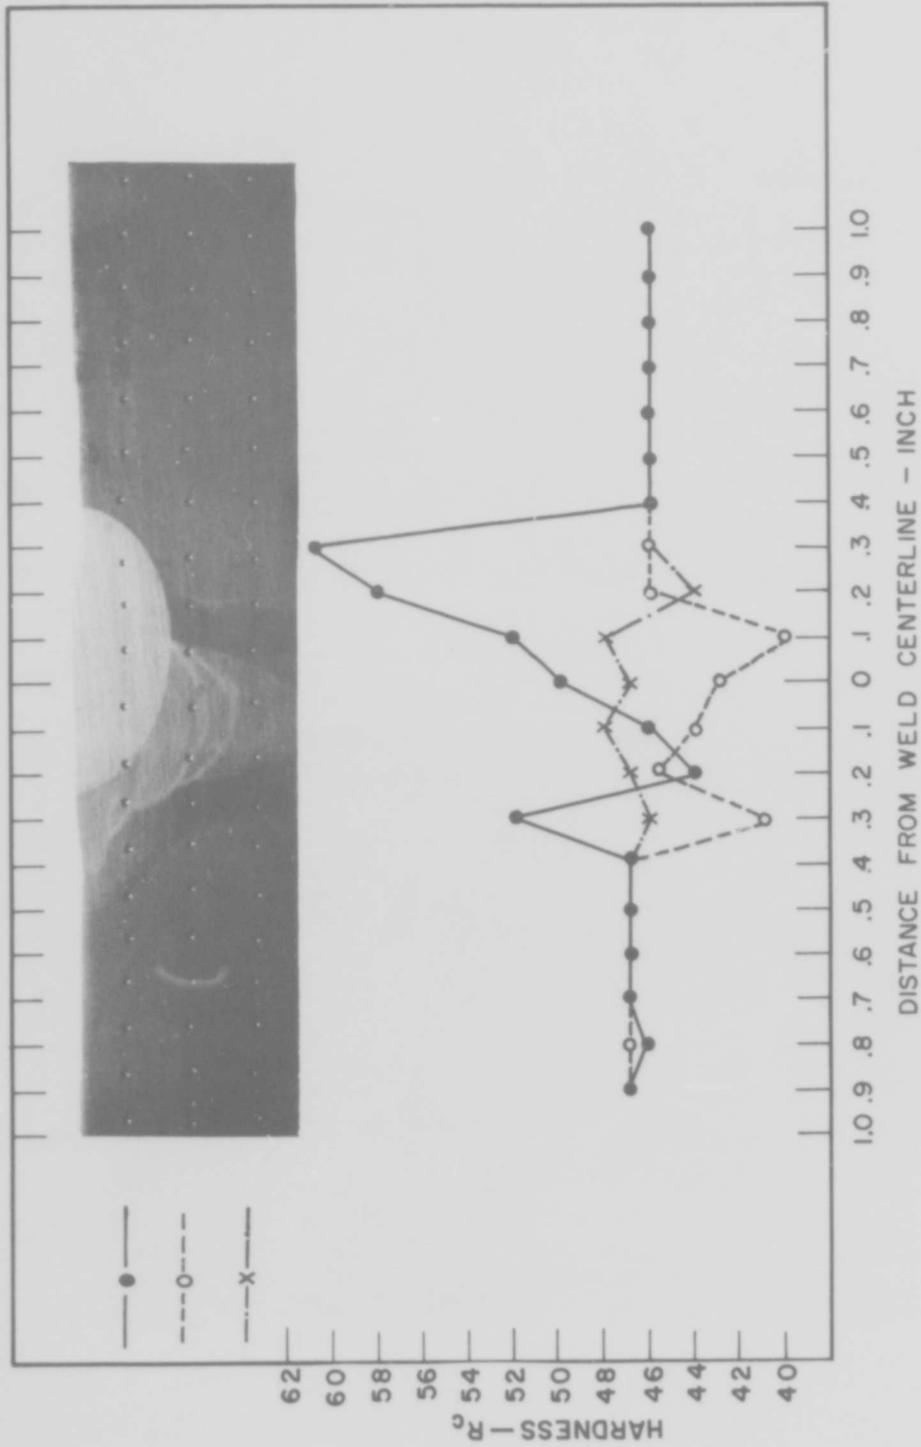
Hardness Survey of TIG Weld No. K287 Made in D6AC Plate at 4 ipm Using Helium Shielding, Filler Wire No. 1, and No Preheat.
